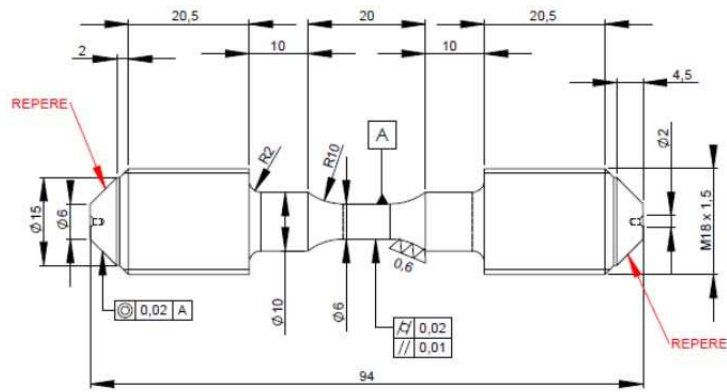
□ Modified FFL2 specimen, dimension in mm.
